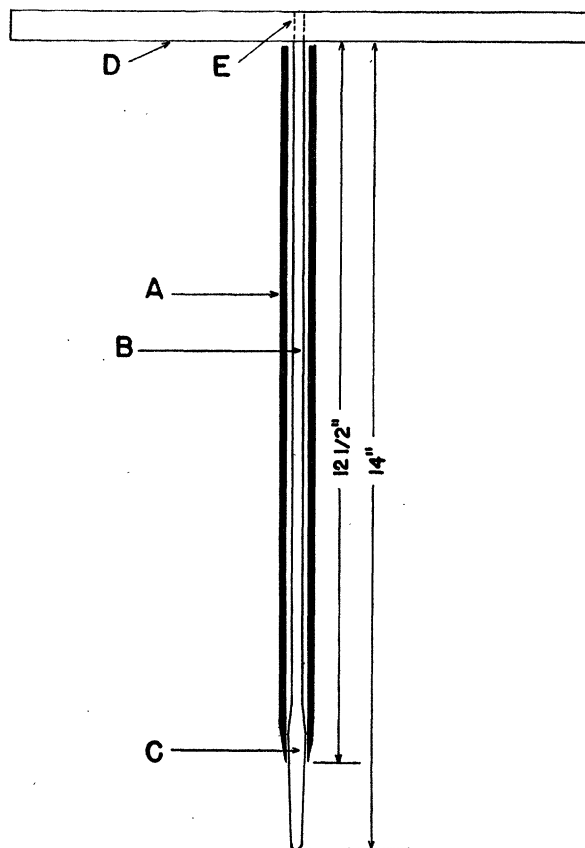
Assembled injection apparatus. A—standard $\frac{1}{4}$ -inch pipe; B— $\frac{1}{4}$ -inch steel rod; C—enlargement tapering toward point; D—pipe handle; E—weld.
